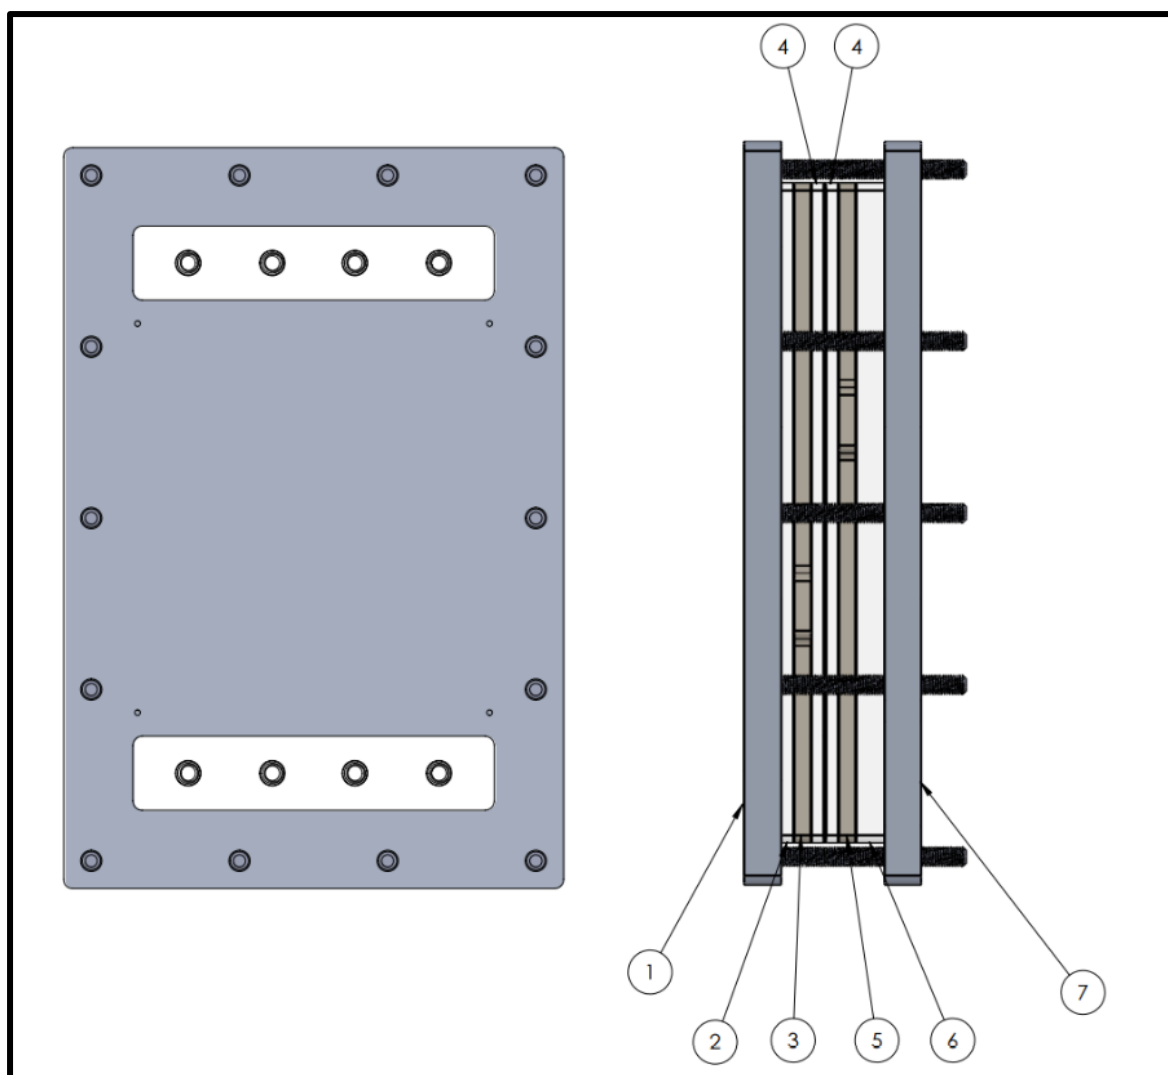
Whole-cell assembly with labeled parts description given in Table 5.1. The dimensions of the fully assembled cell are 27 cm x 40 cm x 12 cm. A GDE could fit in between rubber gaskets between parts 3 and 4 or 4 and 5. A membrane would fit between gaskets and the two chosen flow regions (4 and 4 for a two GDE setup, 3 and 4 or 4 and 5 for a single GDE setup, or 3 and 5 for a conventional 3D electrode flow through setup). The openings on the top compression plate are for clearance for NPT connections.
